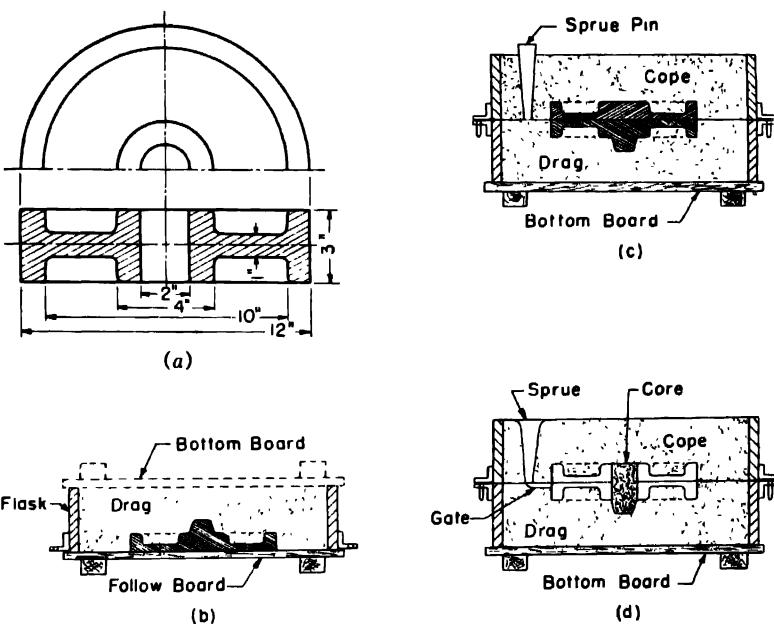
Mold for a gear blank. (a) The machined blank. (b) The drag. (c) The cope. (d) The finished mold.
